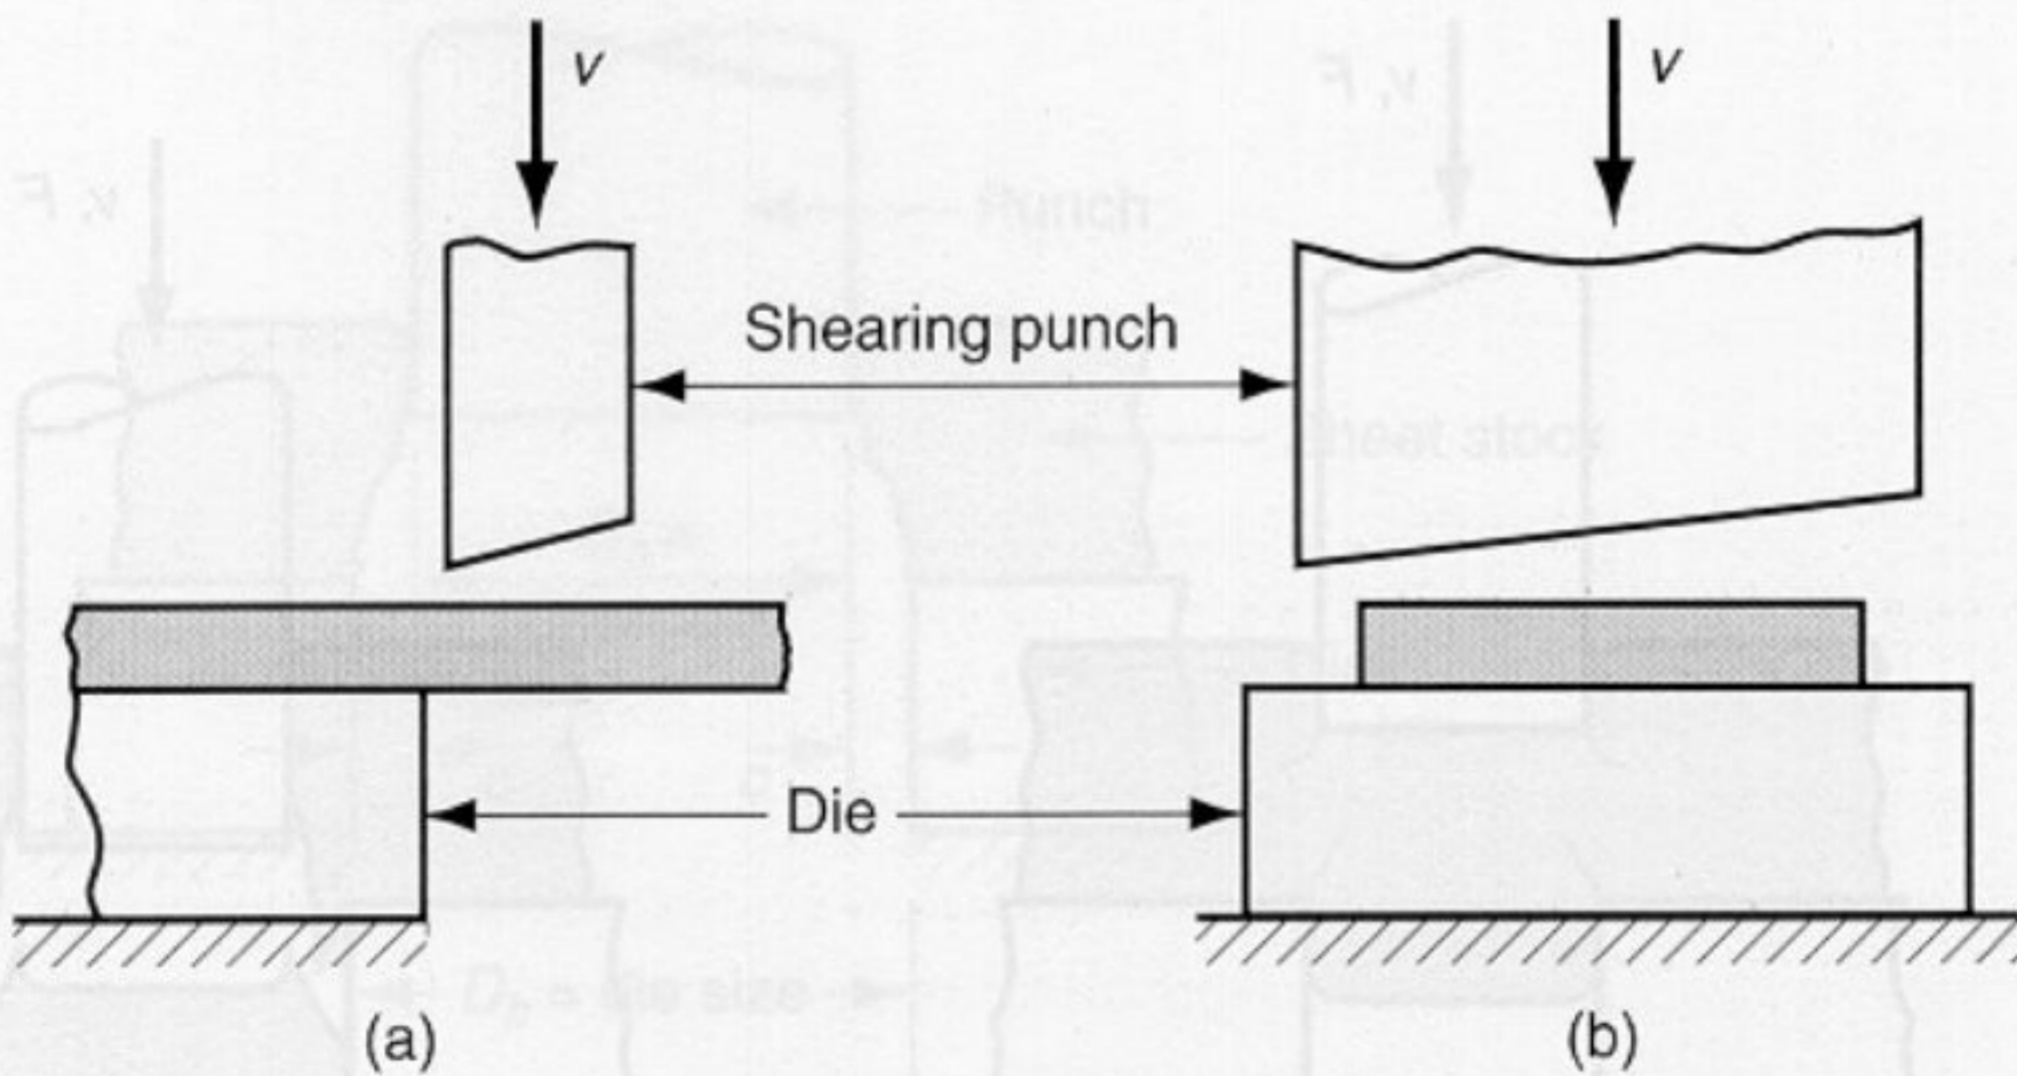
Shearing operation: (a) side view of the shearing operation; (b) front view of power shears equipped with inclined upper cutting blade. Symbol v indicates motion.
